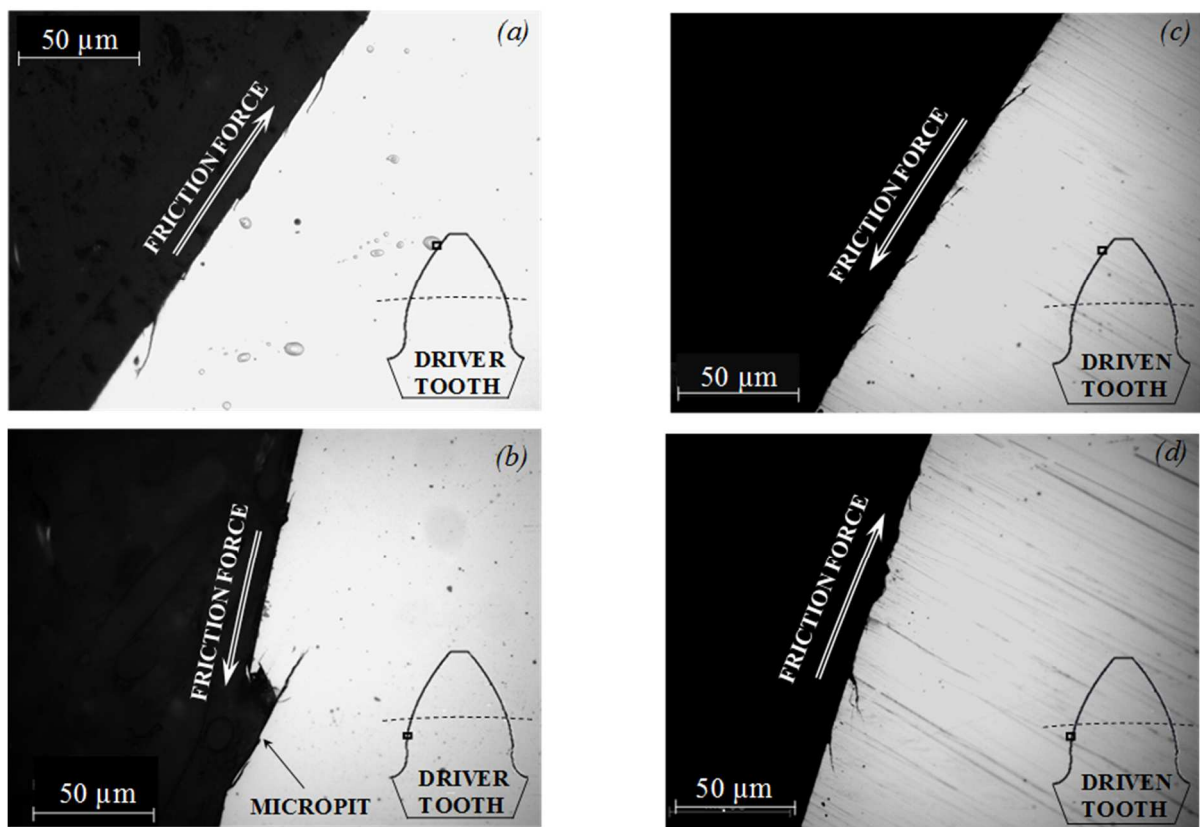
Surface cracks observed in: (a) the addendum of a driver gear, (b) the dedendum of a driver gear, (c) the addendum of a driven gear, (d) the dedendum of a driven gear.
